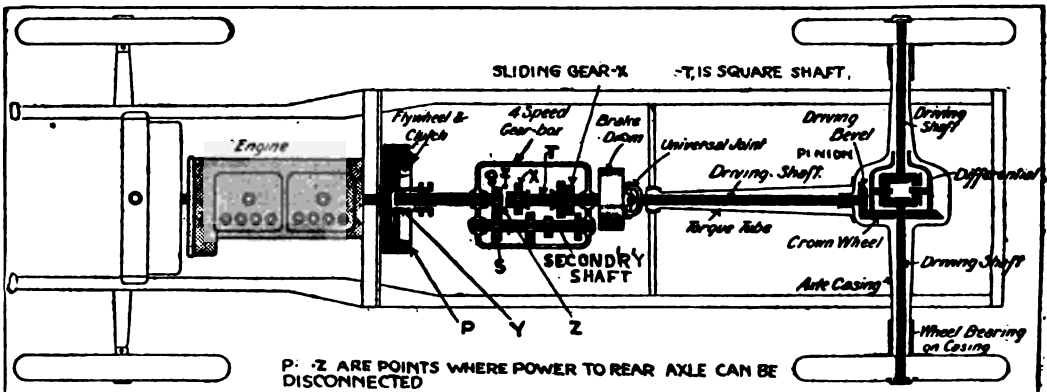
Illustration explains how the power is transmitted from engine to clutch, thence to secondary or counter shaft. Note drive parts are flywheel, clutch, clutch shaft, drive gear (O), secondary shaft gear (S) and gears on secondary shaft. The driven gears are the sliding gears (X) on square shaft (T). Note power to rear axle is disconnected at point (P) when clutch is "out," at which time the clutch and clutch shaft turn free from flywheel, and at (Z) when the drive and driven gears are in "neutral" or not in mesh. (This end of square shaft (T) runs free in end of clutch shaft, as per fig. 8, page 48, and is not actually separated as shown above.)
